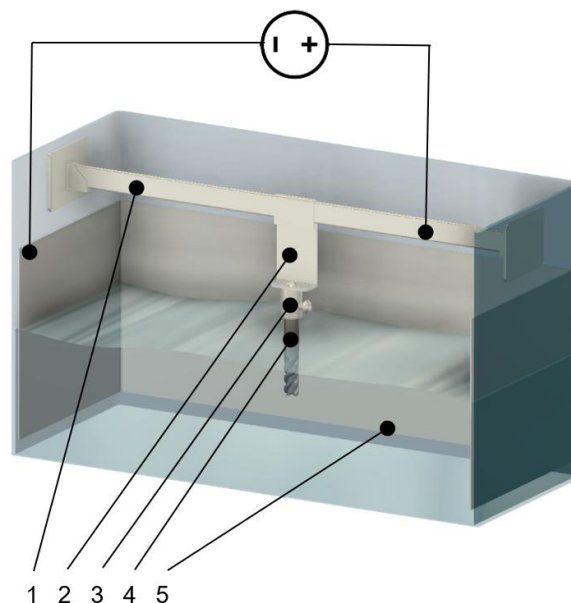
Experimental setup for PDE process with used equipment: hanging rod (1), sample holder (2), clamping sleeve (3) end mill (4), electrolyte (5).
